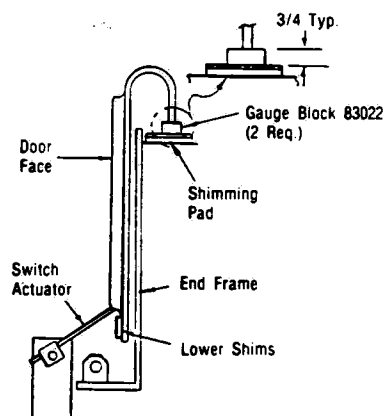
ADJUSTMENT OF DOOR LIMIT SWITCHES.
